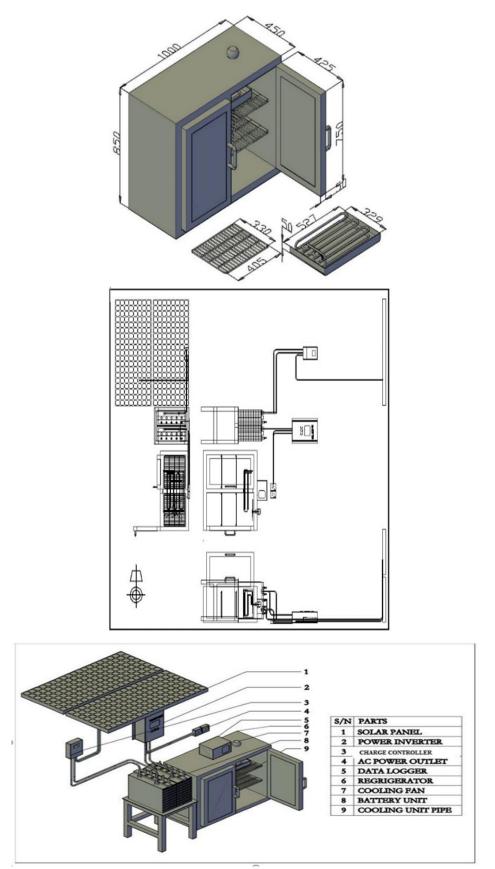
Front view of the cabinet design (c), Back view of the design (d) and Complete view of the design (e).
